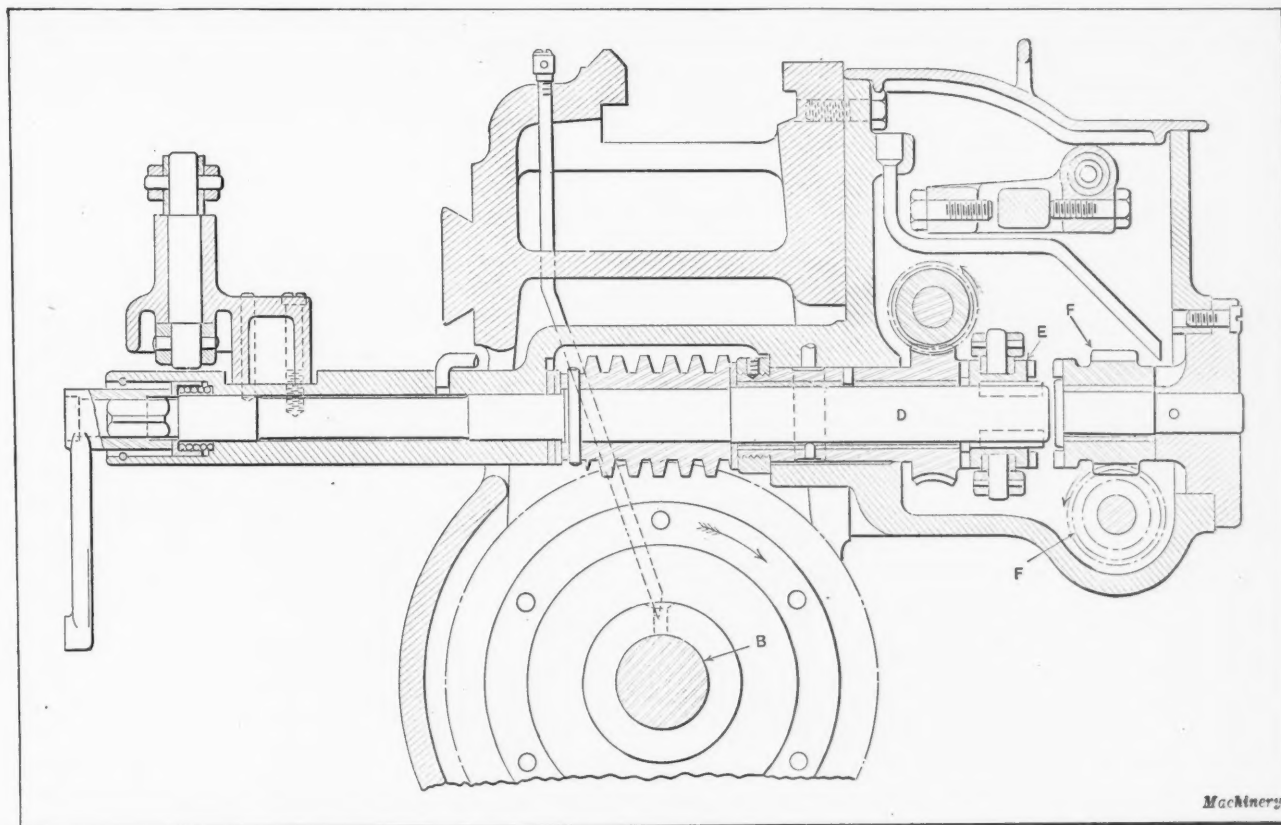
Sectional View of Mechanism by Means of which Fast and Slow Rotation is imparted to the Camshaft
